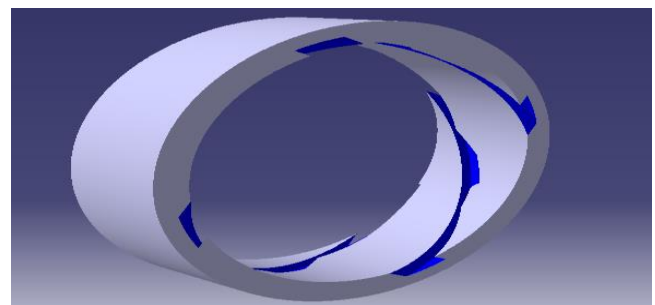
3D view of rotor of rim-rotor rotary ramjet engine
